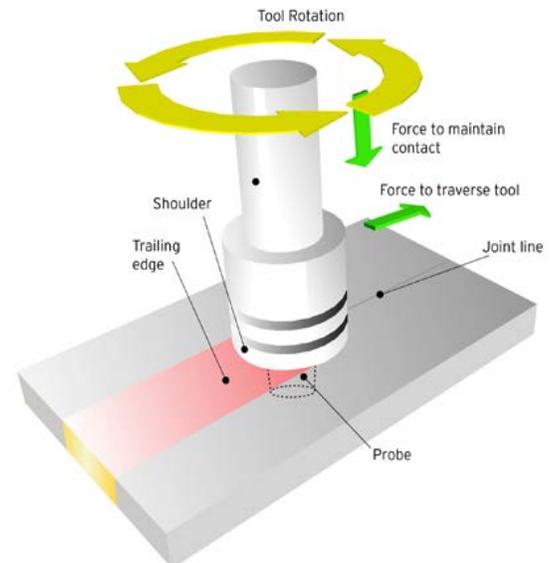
Schematic of Friction Stir Welding [2]
